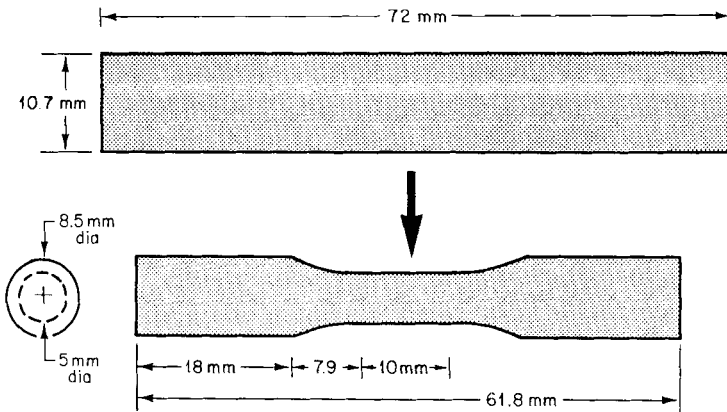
Schematic drawing of molded specimens and machined fatigue testing specimens.
